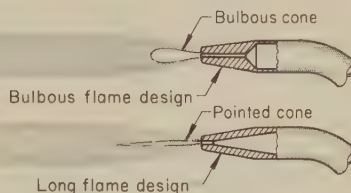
Shapes of inner cones of oxyacetylene welding flames, produced by welding tips with two different bore configurations. Varying the transition taper produces cone shapes intermediate between those shown.
